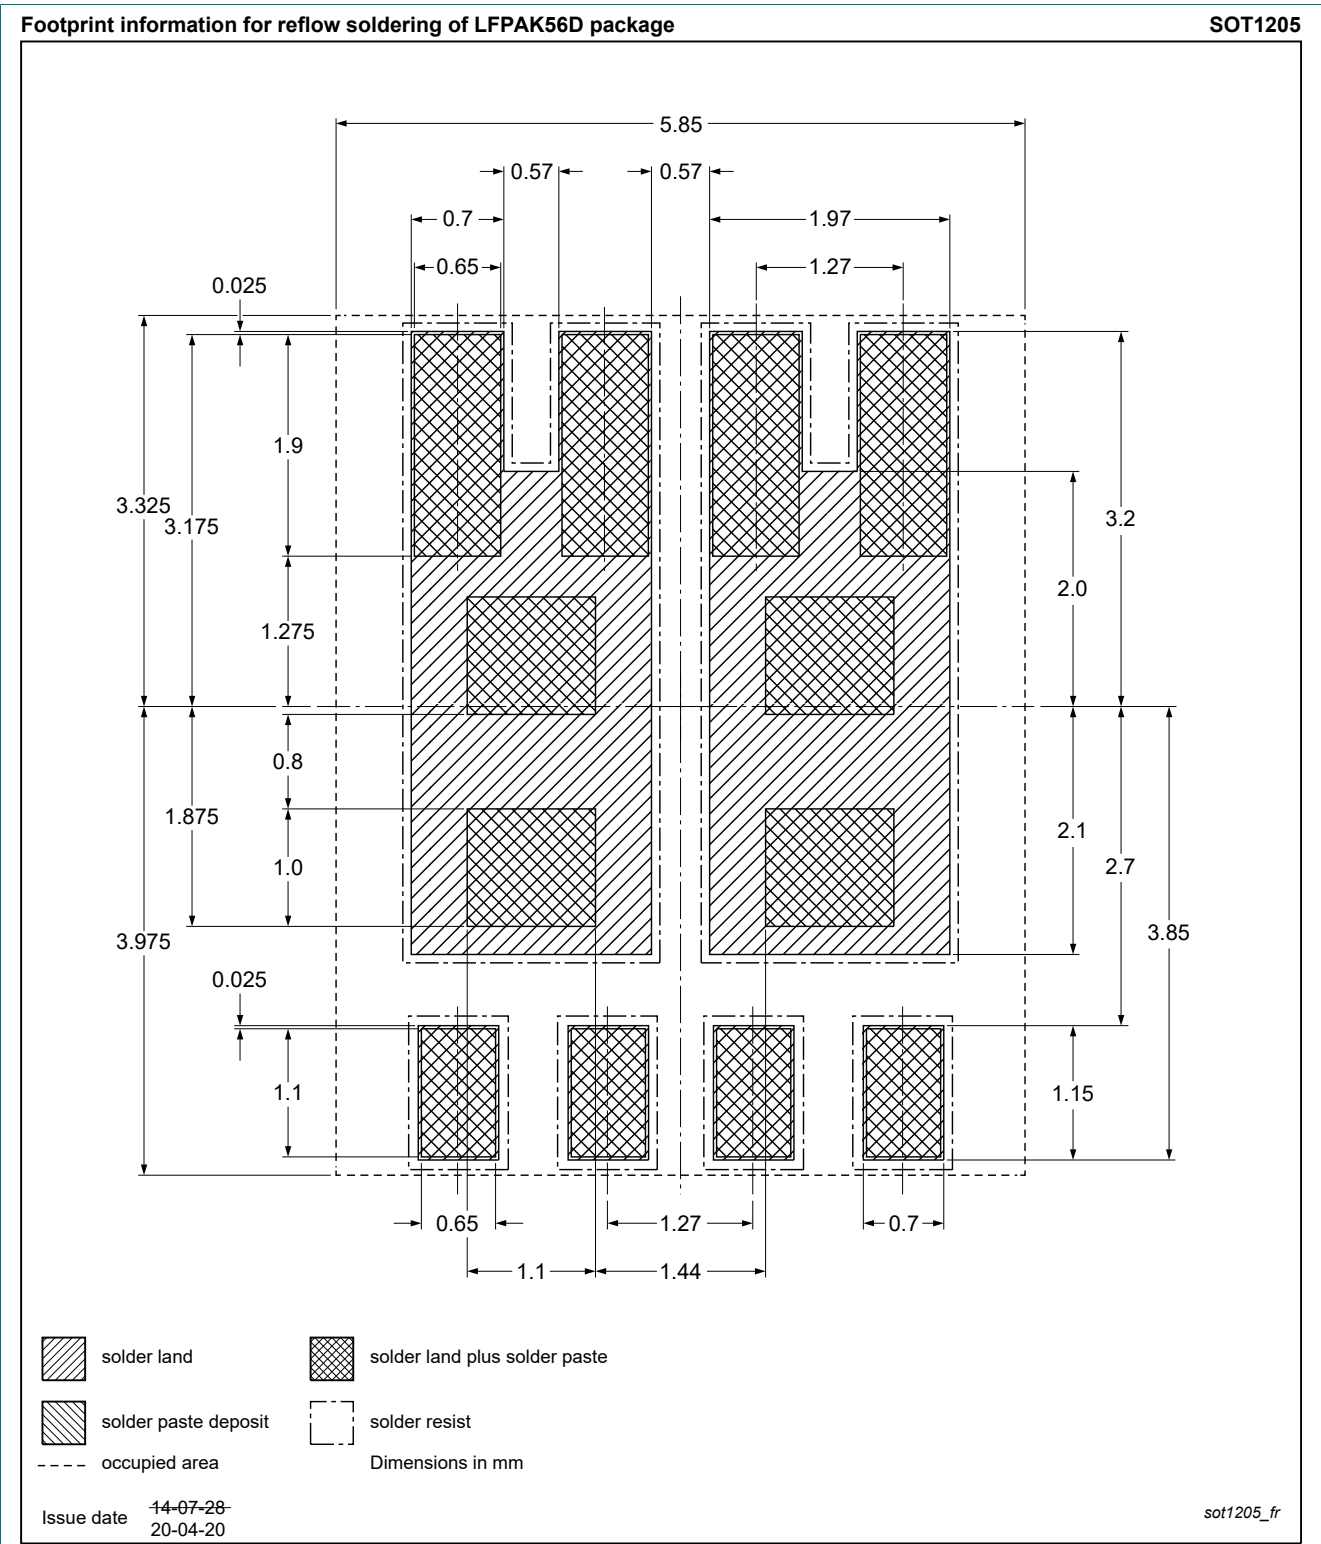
Reflow soldering footprint for LPAK56D; Dual LPAK (SOT1205)
